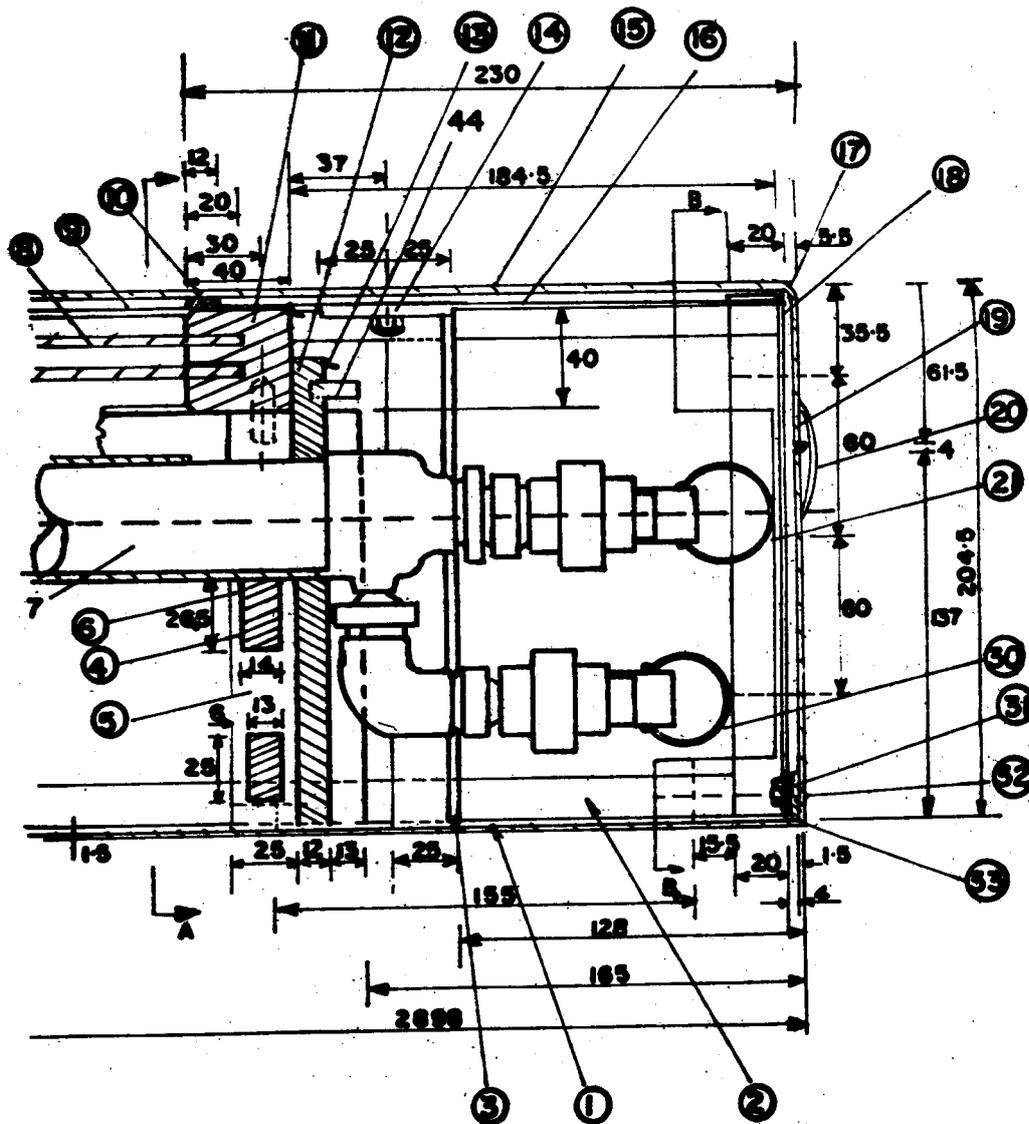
Longitudinal Cross-Section of new Collector (Scale x1/2mm)
